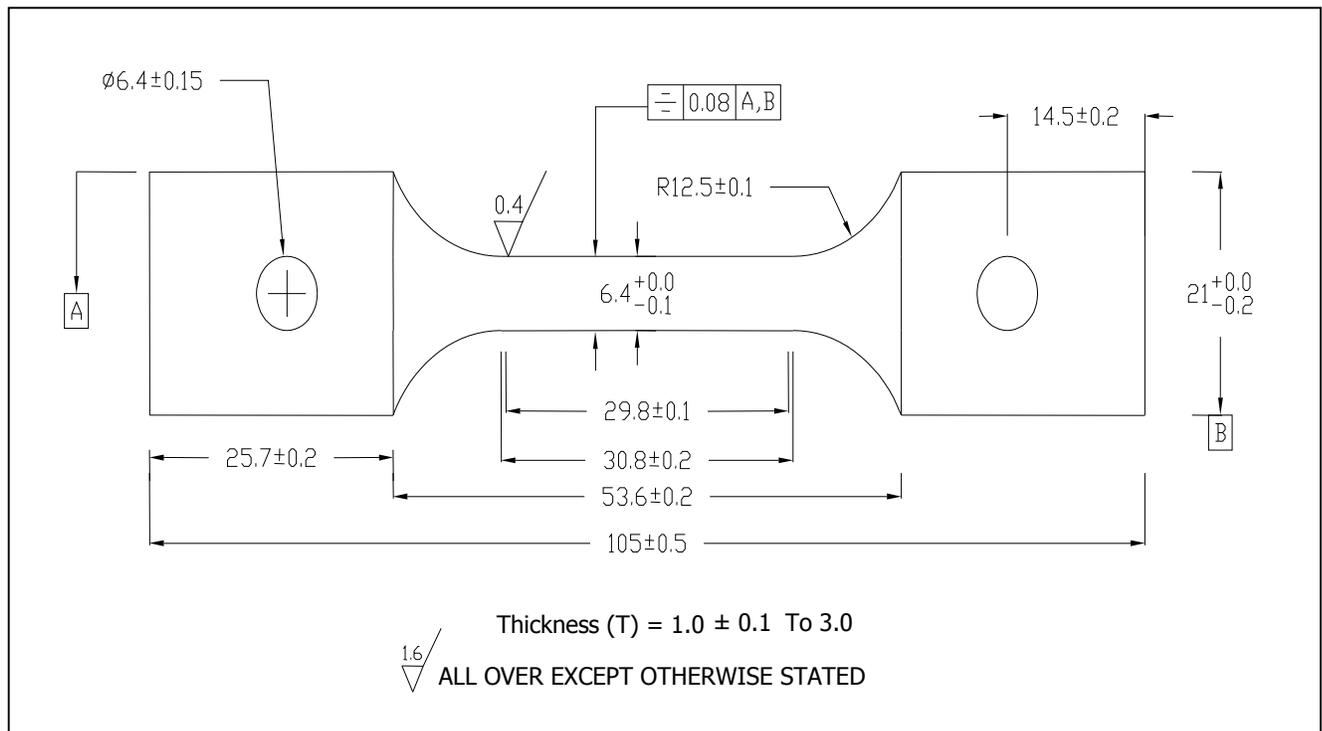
Specimen Drawing for Tensile test (DMRL practice)[77]
